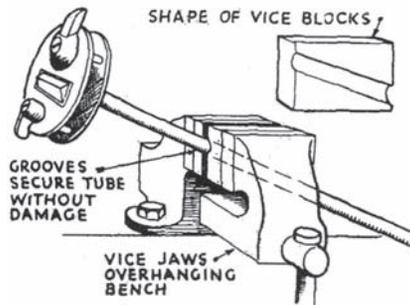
VICE ATTACHMENT TO HOLD CONTROL ASSEMBLY FOR SERVICING
